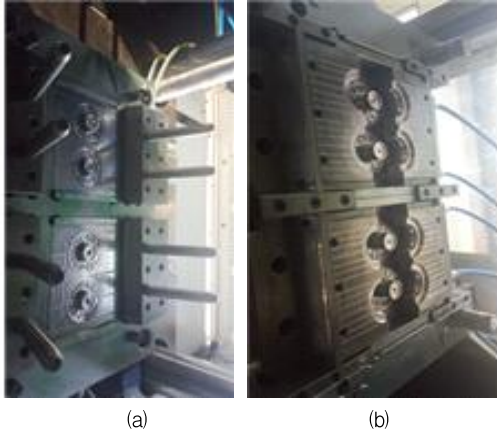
Mold for roller molding : (a)fixed half (b)moving half
